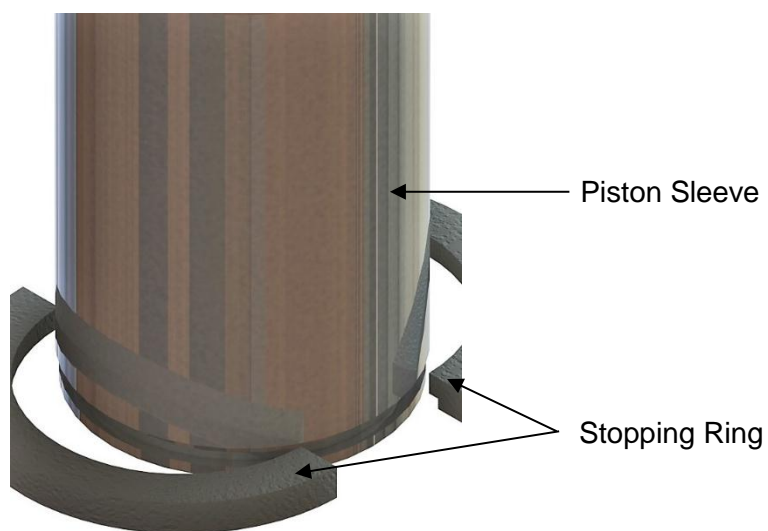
Partial assembly view of the Stopping Ring and Piston Sleeve
